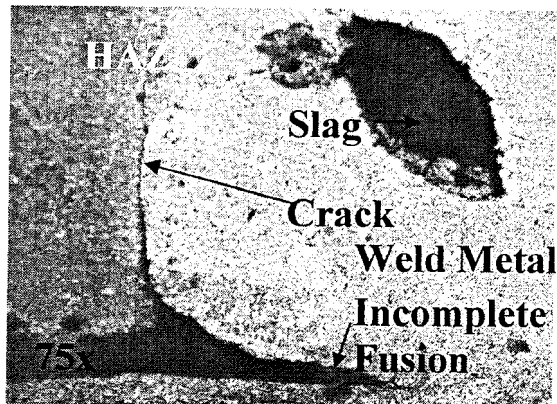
Vertical Crack, Non-fused Root- Specimen T-5, Section A
